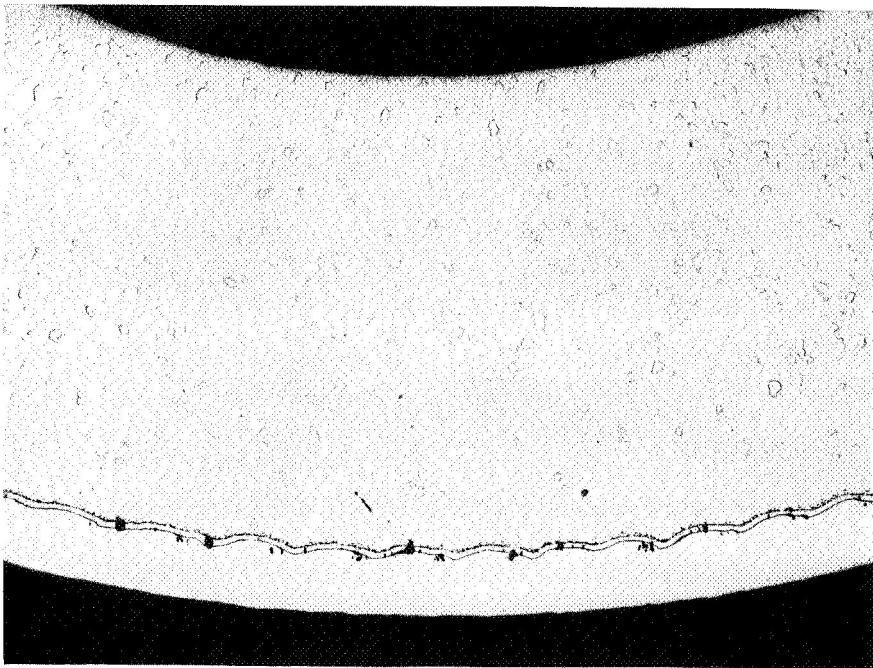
EXPLOSIVELY WELDED THIN COMPOSITE SPECIMEN SS/Ti-3 AFTER BEND-TEST EVALUATION
